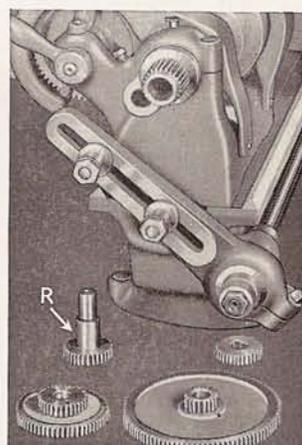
Gears Removed to Show Bracket Which Holds Gears for Threads and Feeds.
